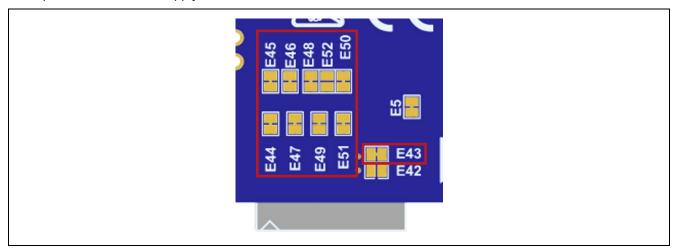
Pmod 2 Copper Jumpers (FPB-RA0L1 Bottom View)
